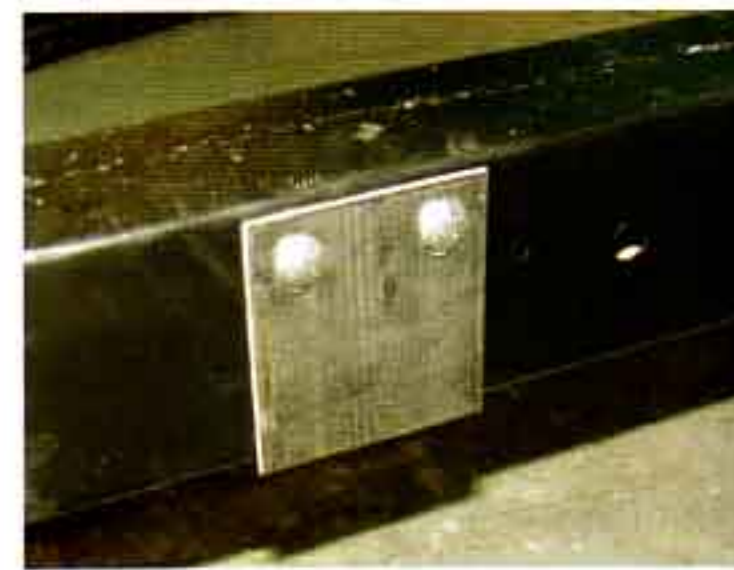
& 16b: The elbow mounting brackets and outer backing plates are held to the frame with two 3/8" X 5" bolts with flat washers, lock washers and nuts.
